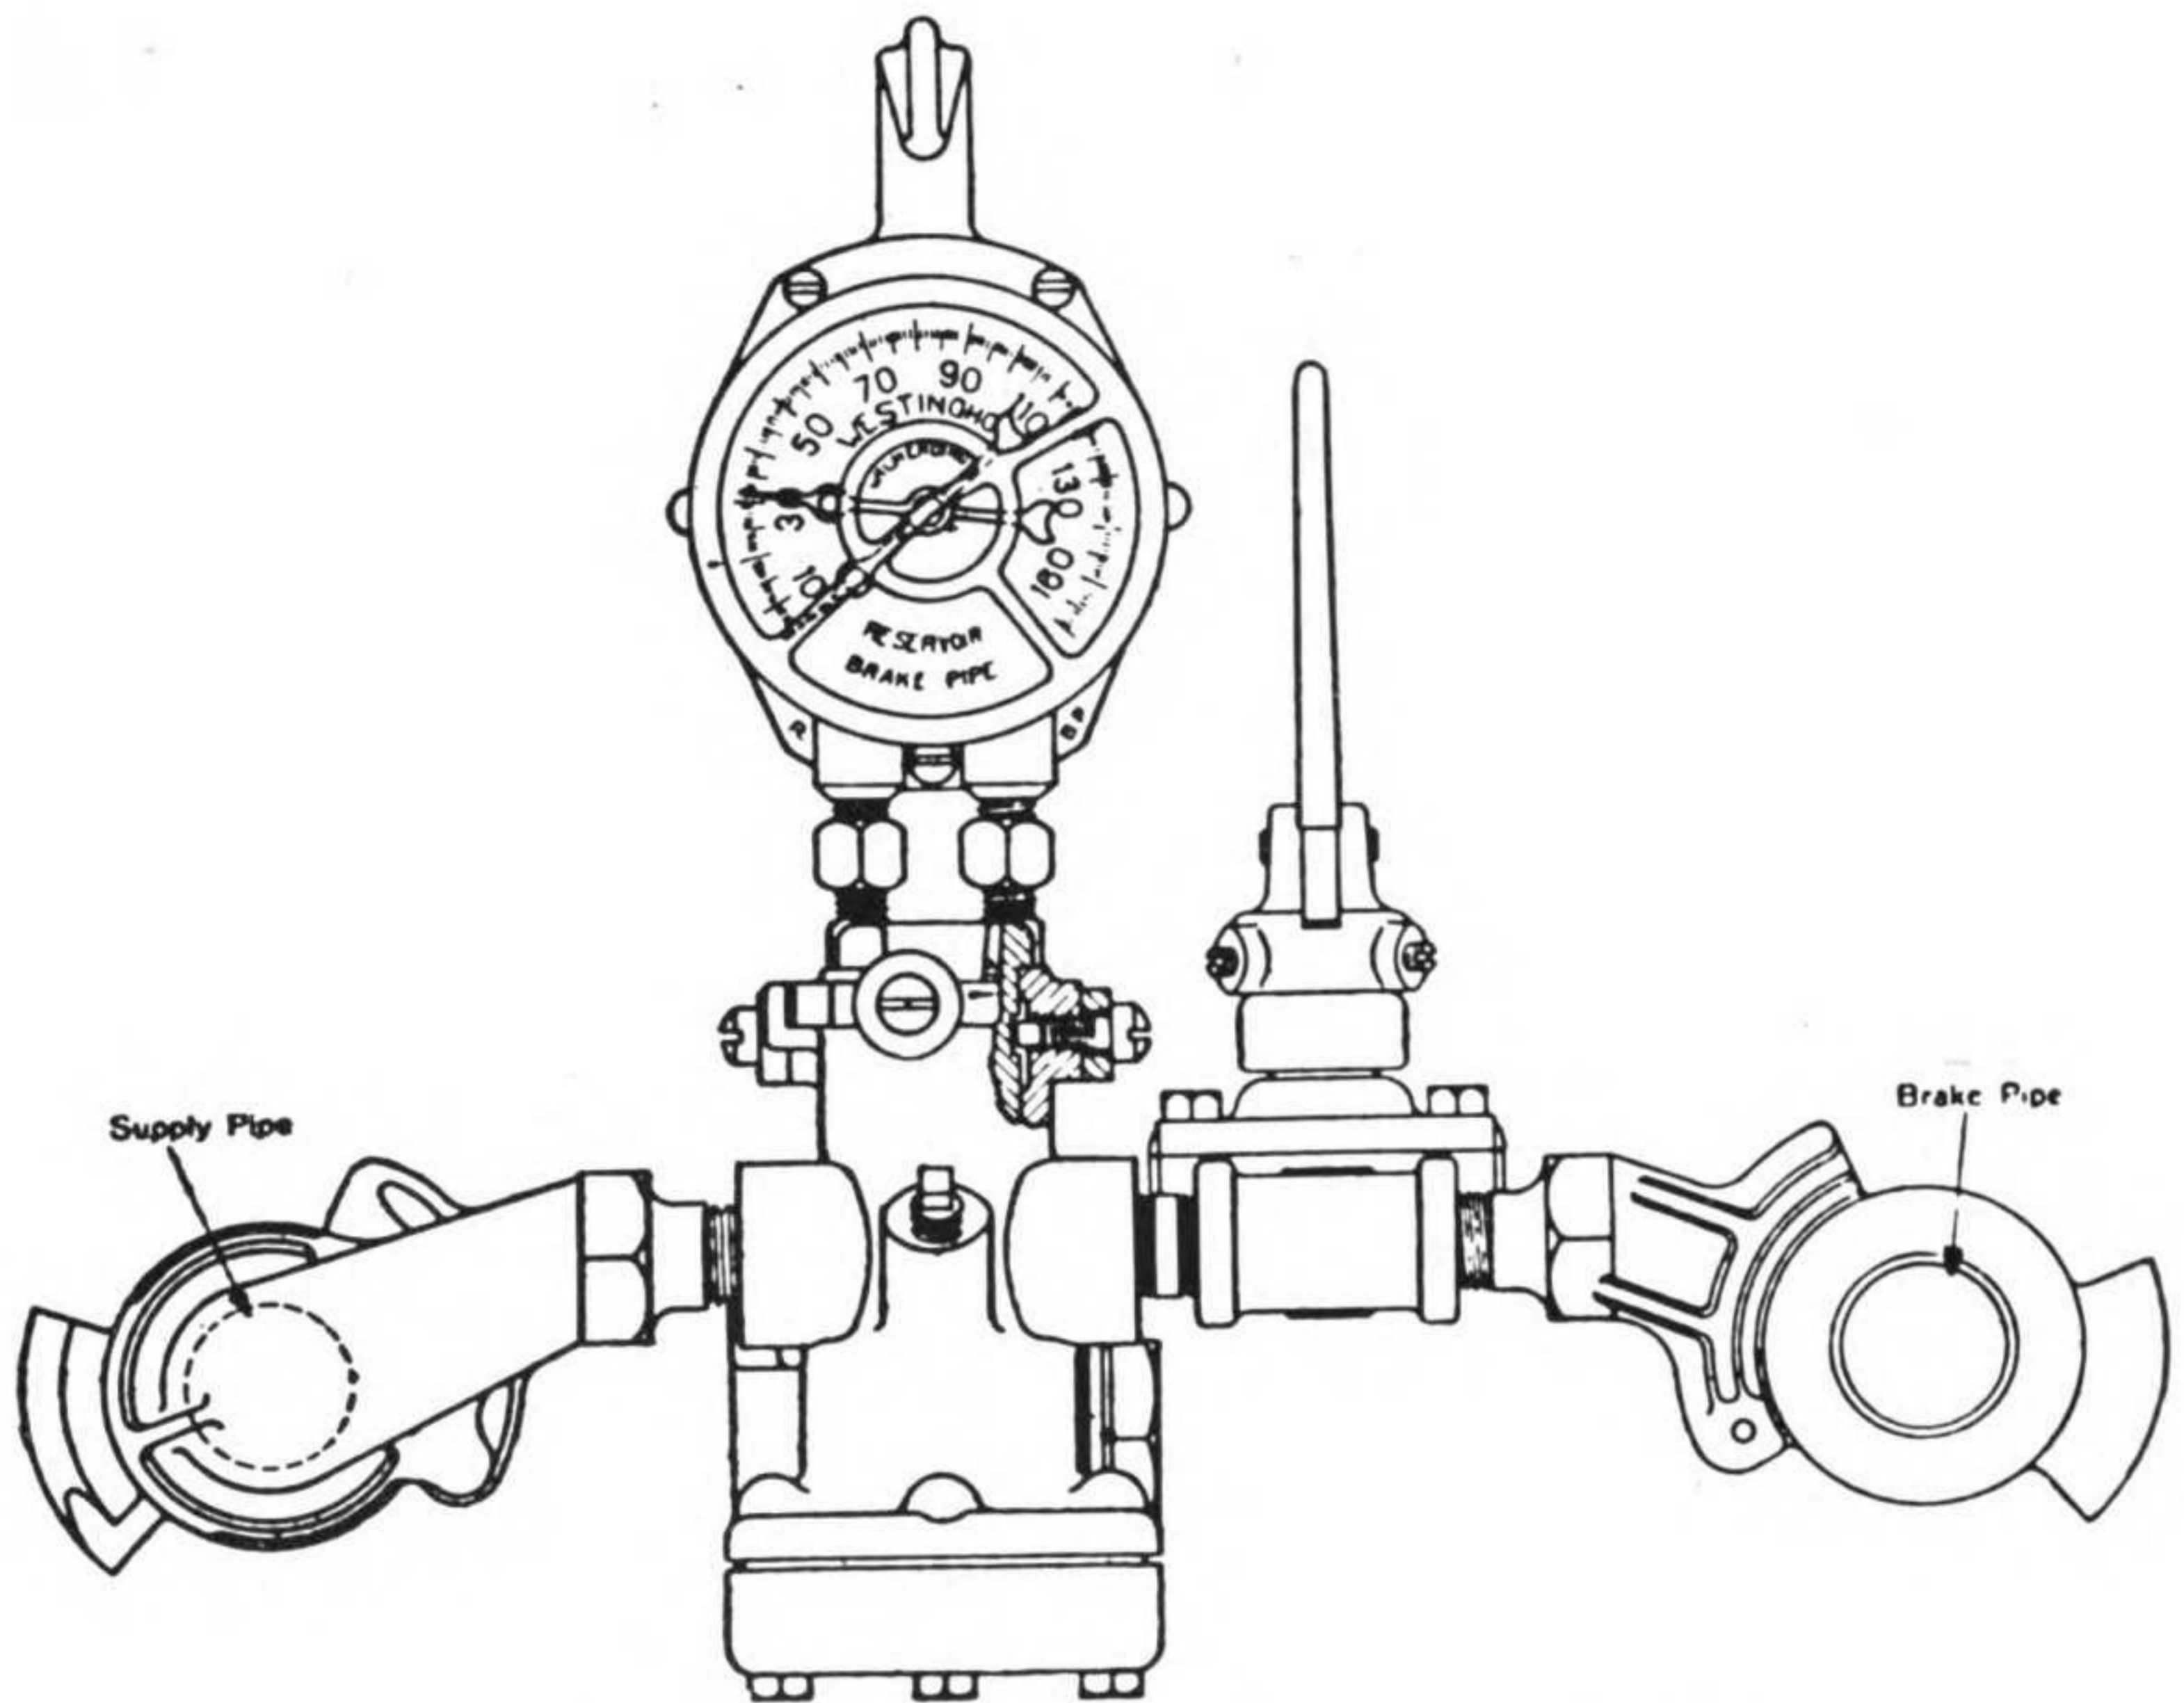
Single car testing device (side view). (TC stock No. 18-8084-80-100.)
